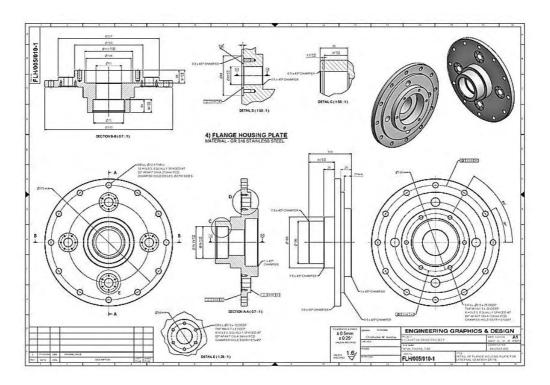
An example of Engineering Drawing of a Flange Housing. Source :< www. engd.com.au > 25/10/10
